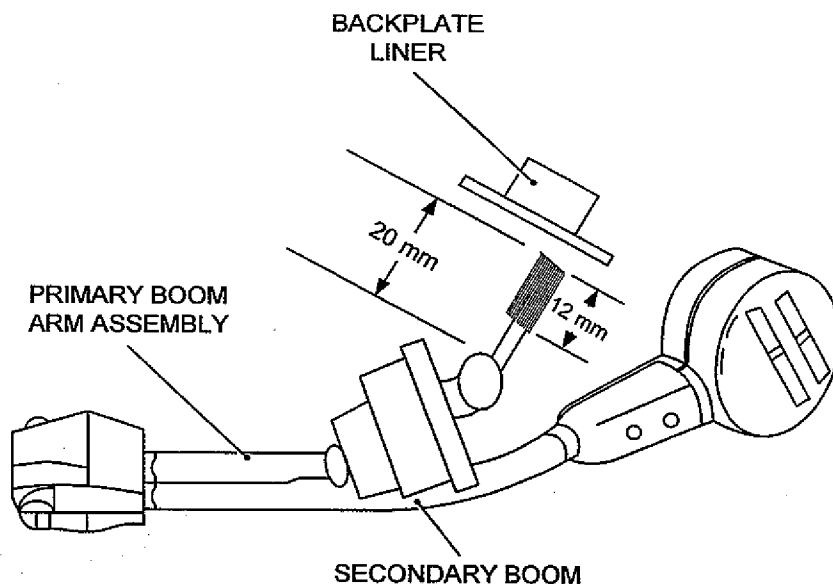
Boom microphone assembly 5965-99-000-5983: fitting of backplate liner
